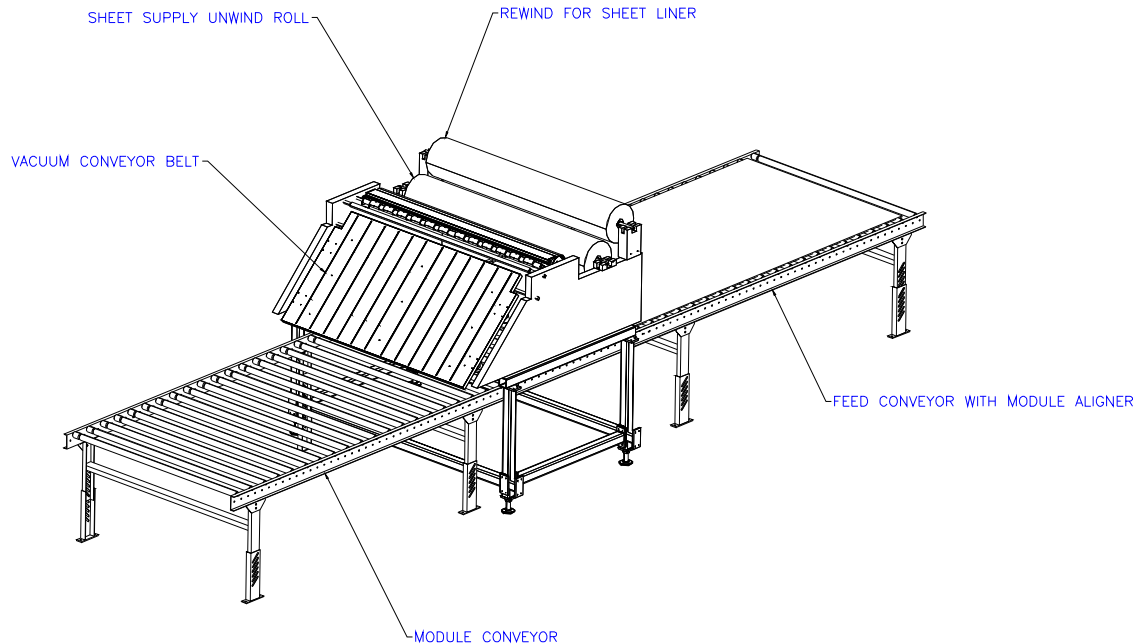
Module conveyor with CSA sheeter configured for EVA dispensing on glass.
